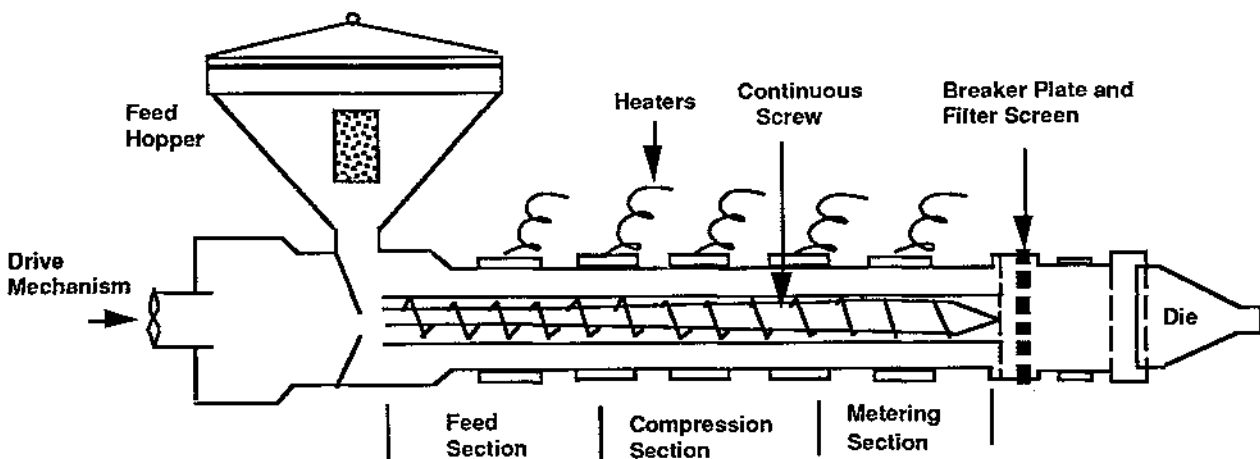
Cross-Section Diagram of a Horizontal Single-Screw Extruder for Polyethylene
